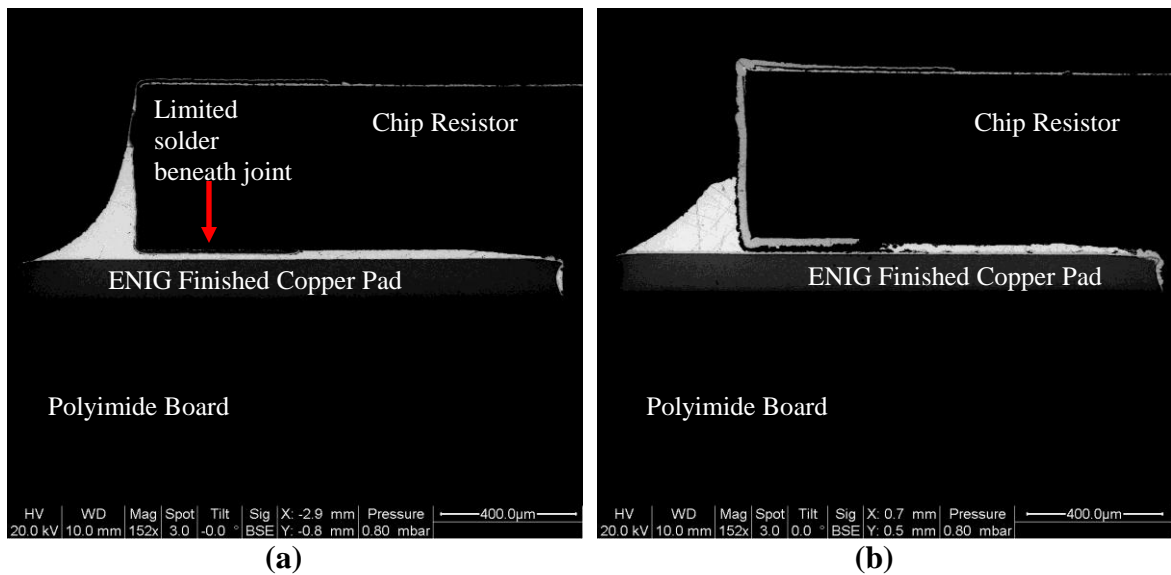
Examples of poor manufacturing of SAC+Mn chip resistor joints, (a) as reflowed (b) 500hr aging at 200°C (courtesy CALCE).
